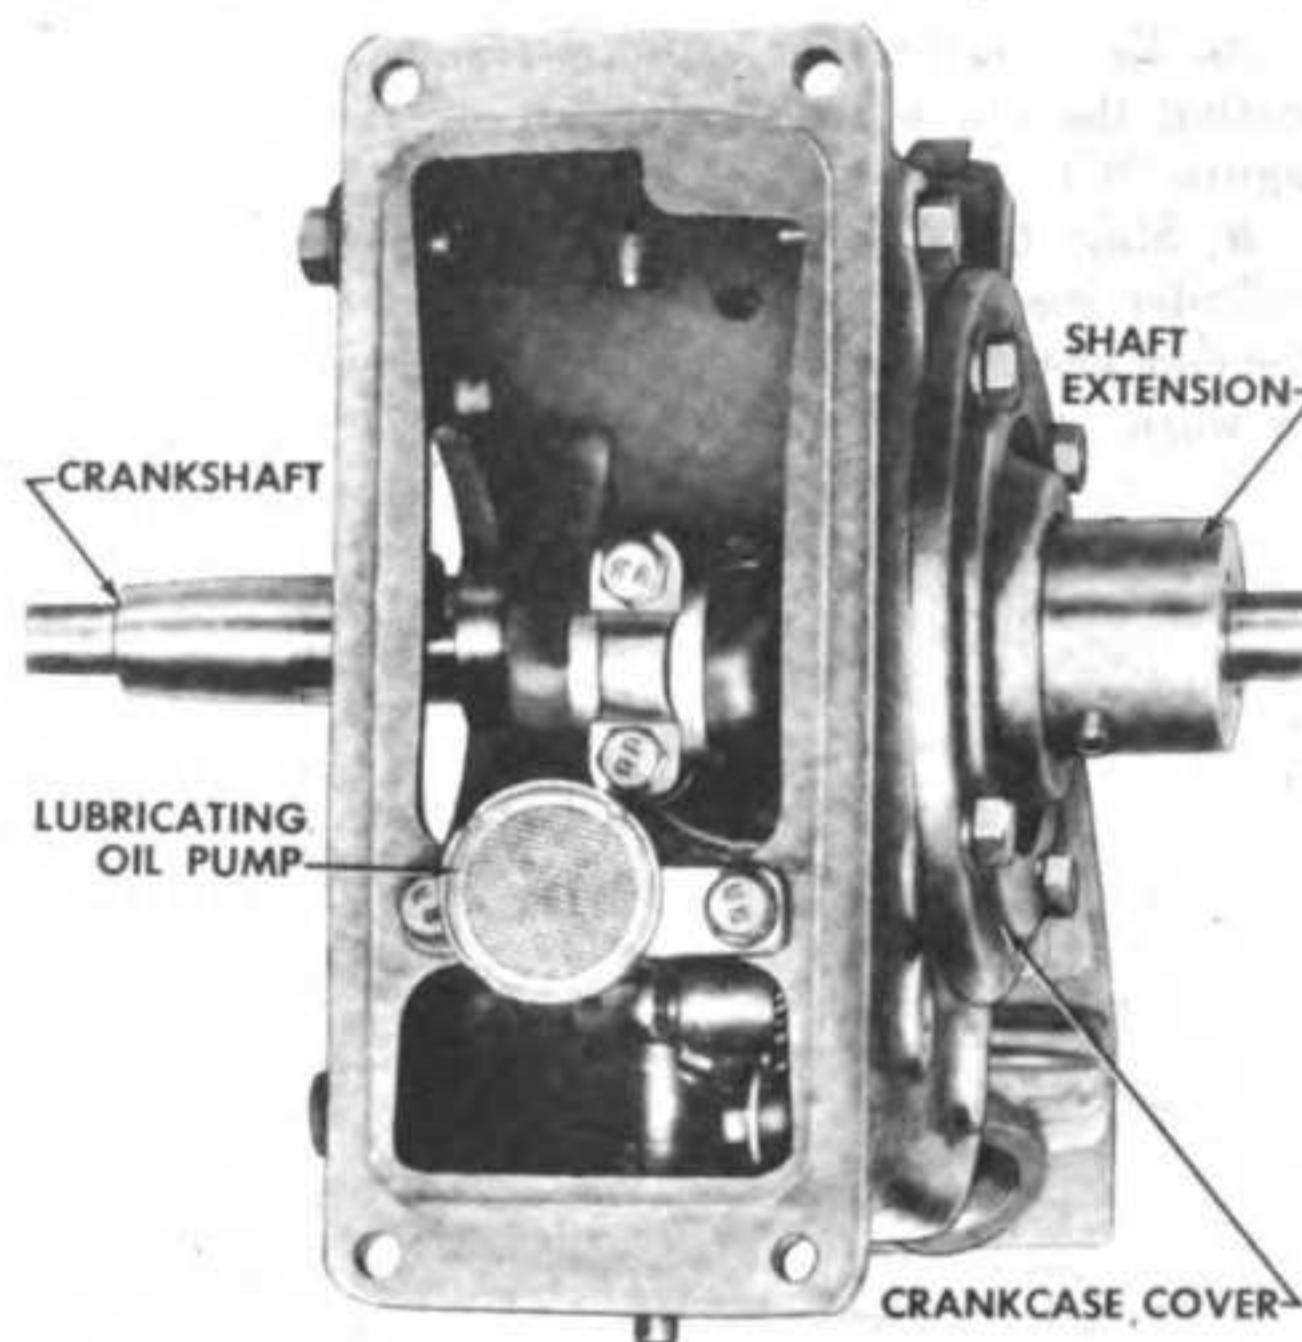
Underside of Cylinder Assembly, Showing Oil Pump
